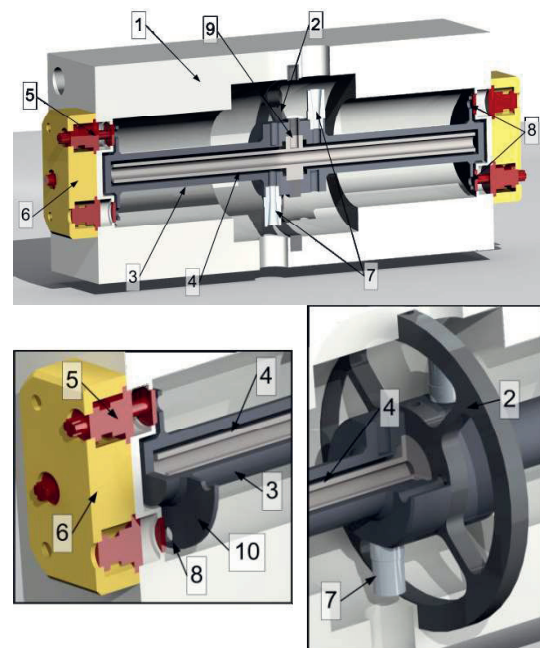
Sensor setup: 1) housing, 2) mounting spring, 3) outer pipe, 4) inner pipe, 5) actuation coils, 6) coil housing, 7) in- outlet, 8) drills for permanent magnets, 9) drill for temperature sensor and 10) fly wheels.
